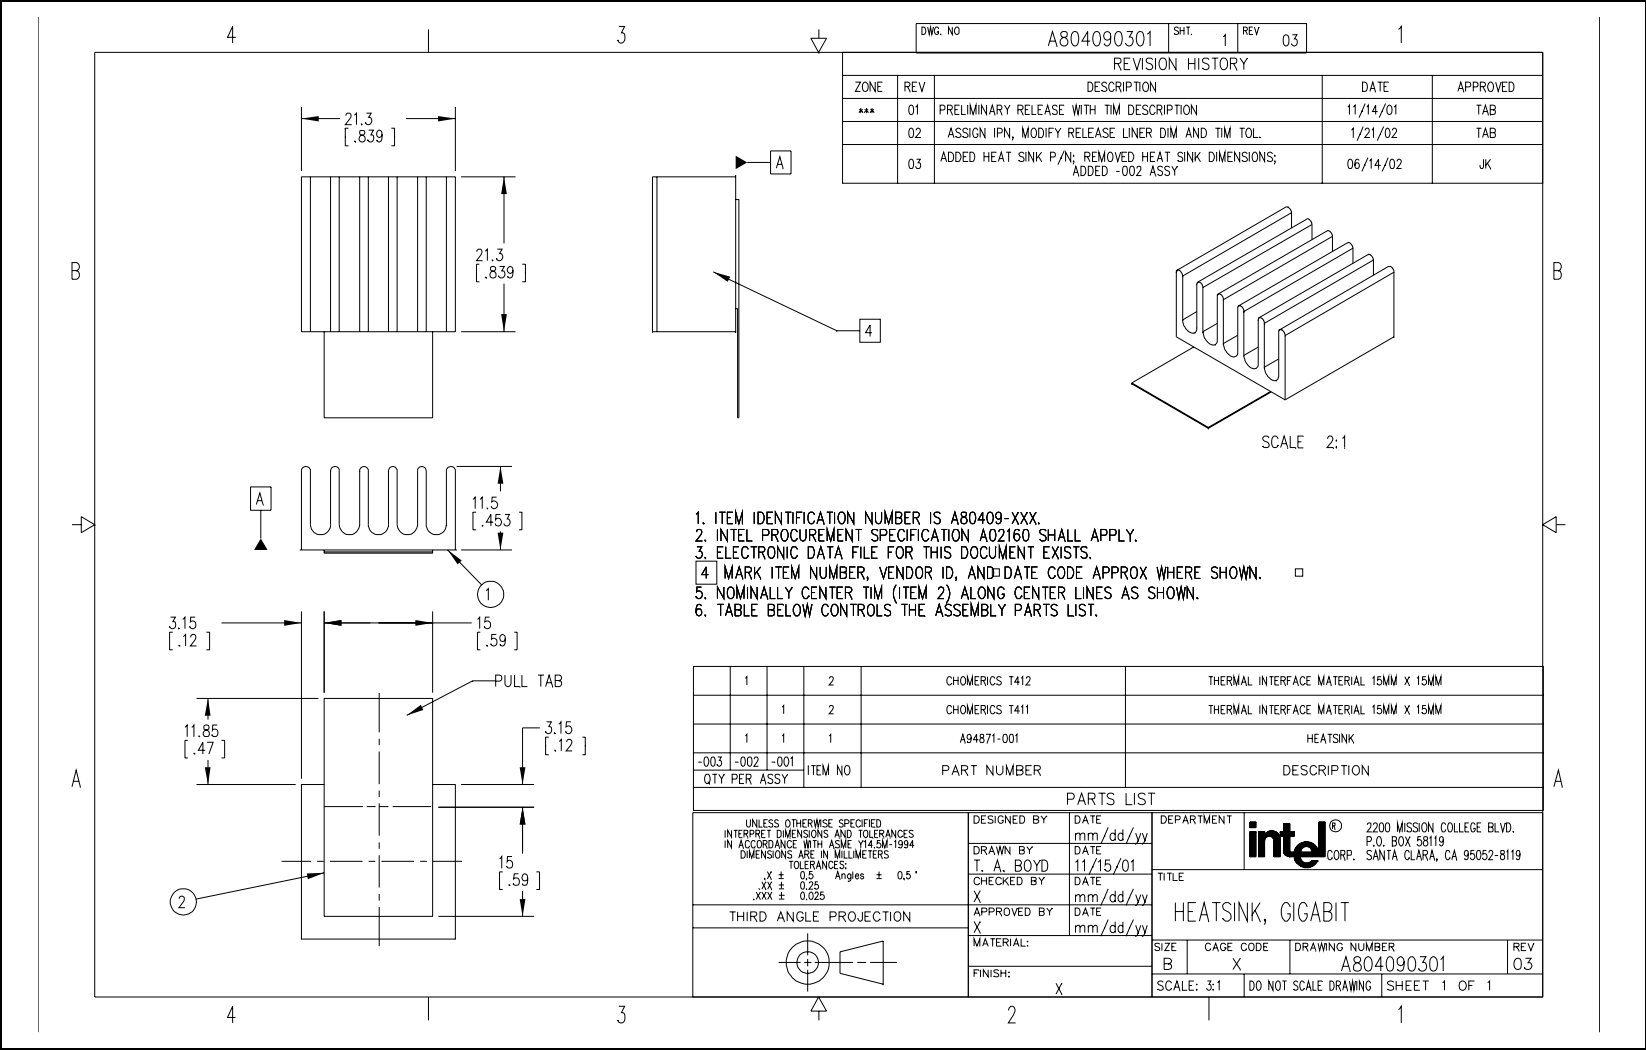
Thermal Adhesive Tape Heatsink Drawing
